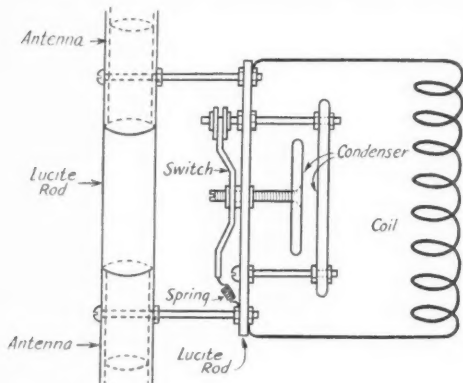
A sketch showing the mechanical construction of the phasing section. The bolts that fasten the Lucite rod in the tubing also serve to hold the strip that supports the coil and condenser.
